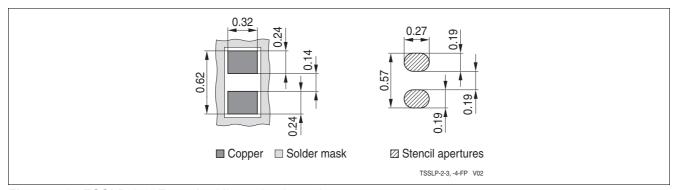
TSSLP-2-3: Footprint (dimension in mm)
